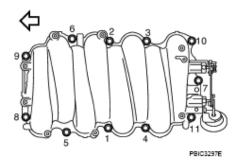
Identifying Intake Manifold Bolt Loosening Sequence (Upper) Courtesy of NISSAN MOTOR CO., U.S.A.
